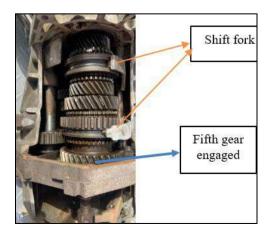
This is a diagram of how the fifth gear is getting engaged from the lever.
